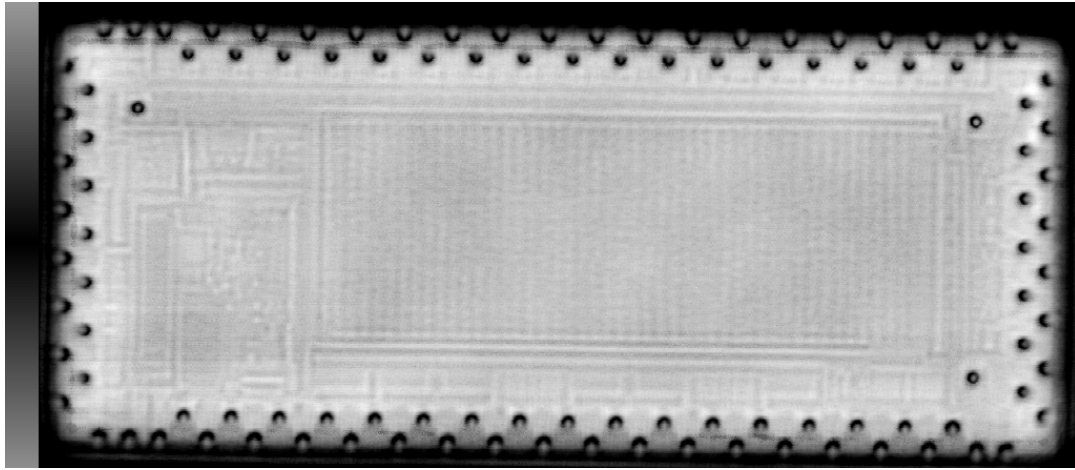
A plan of a c-scan image of flip chip package soldered on a PCB board using a 230 MHz transducer with a spot size of 16 μm and focal depth of 186 μm .
